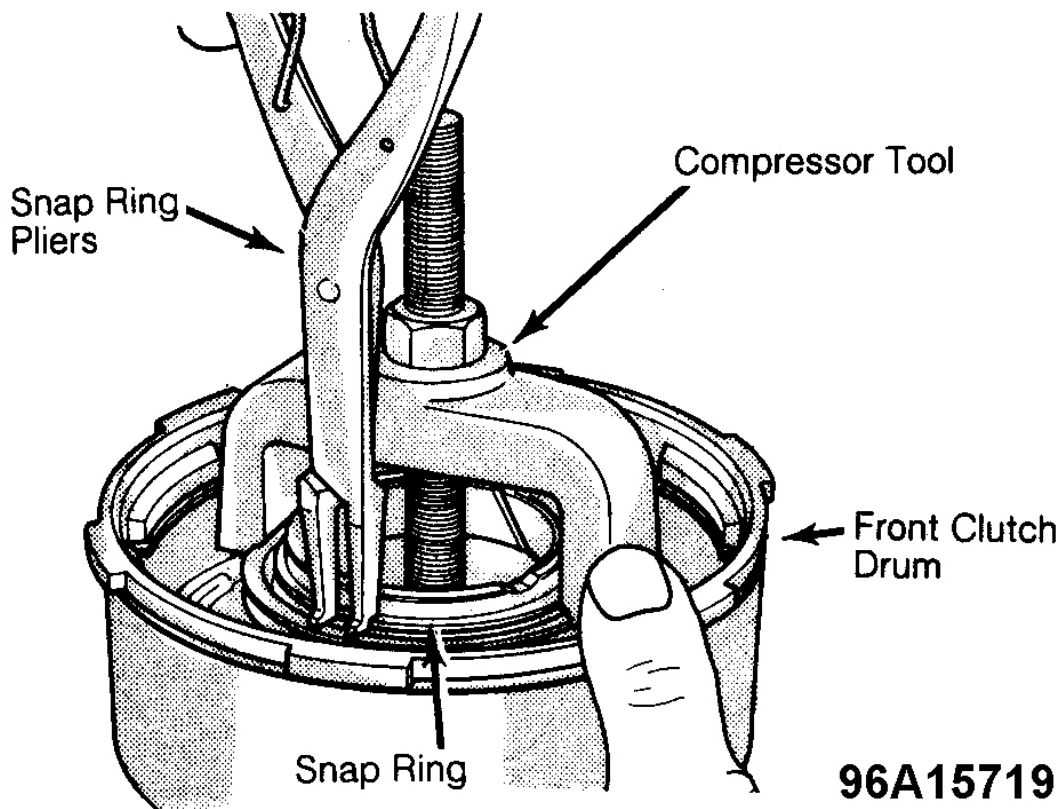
Removing Front Clutch Return Spring Snap Ring
